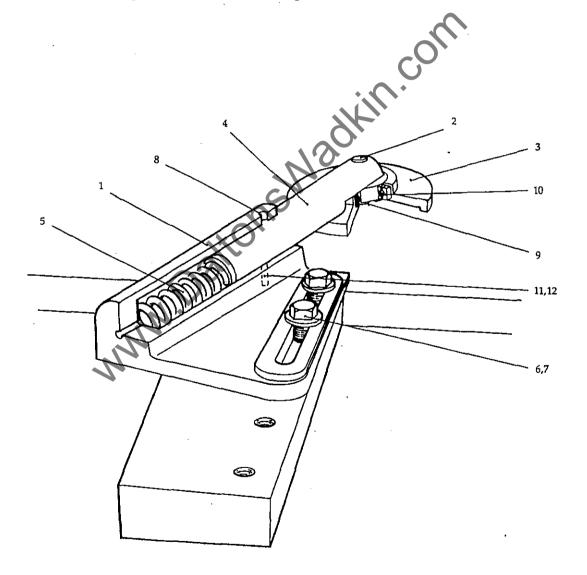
SINGLE SIDE ROLLER PRESSURE UNIT
